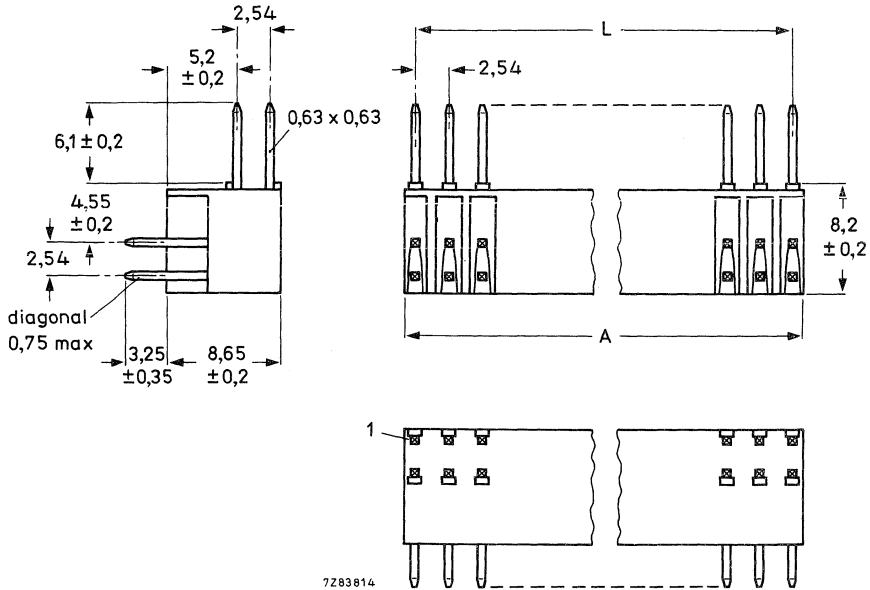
Male header with 90° angled pins; see Table 1 for dimensions A and L.
